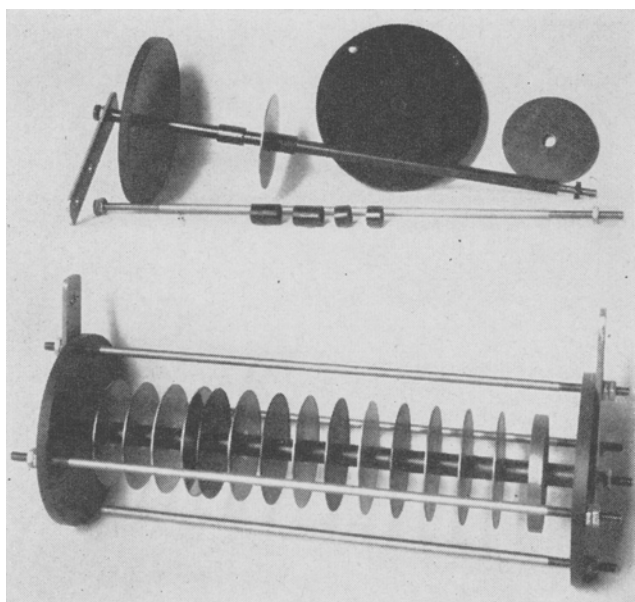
Spool-type specimen holder used in testing corrosion of metals in plant equipment.
